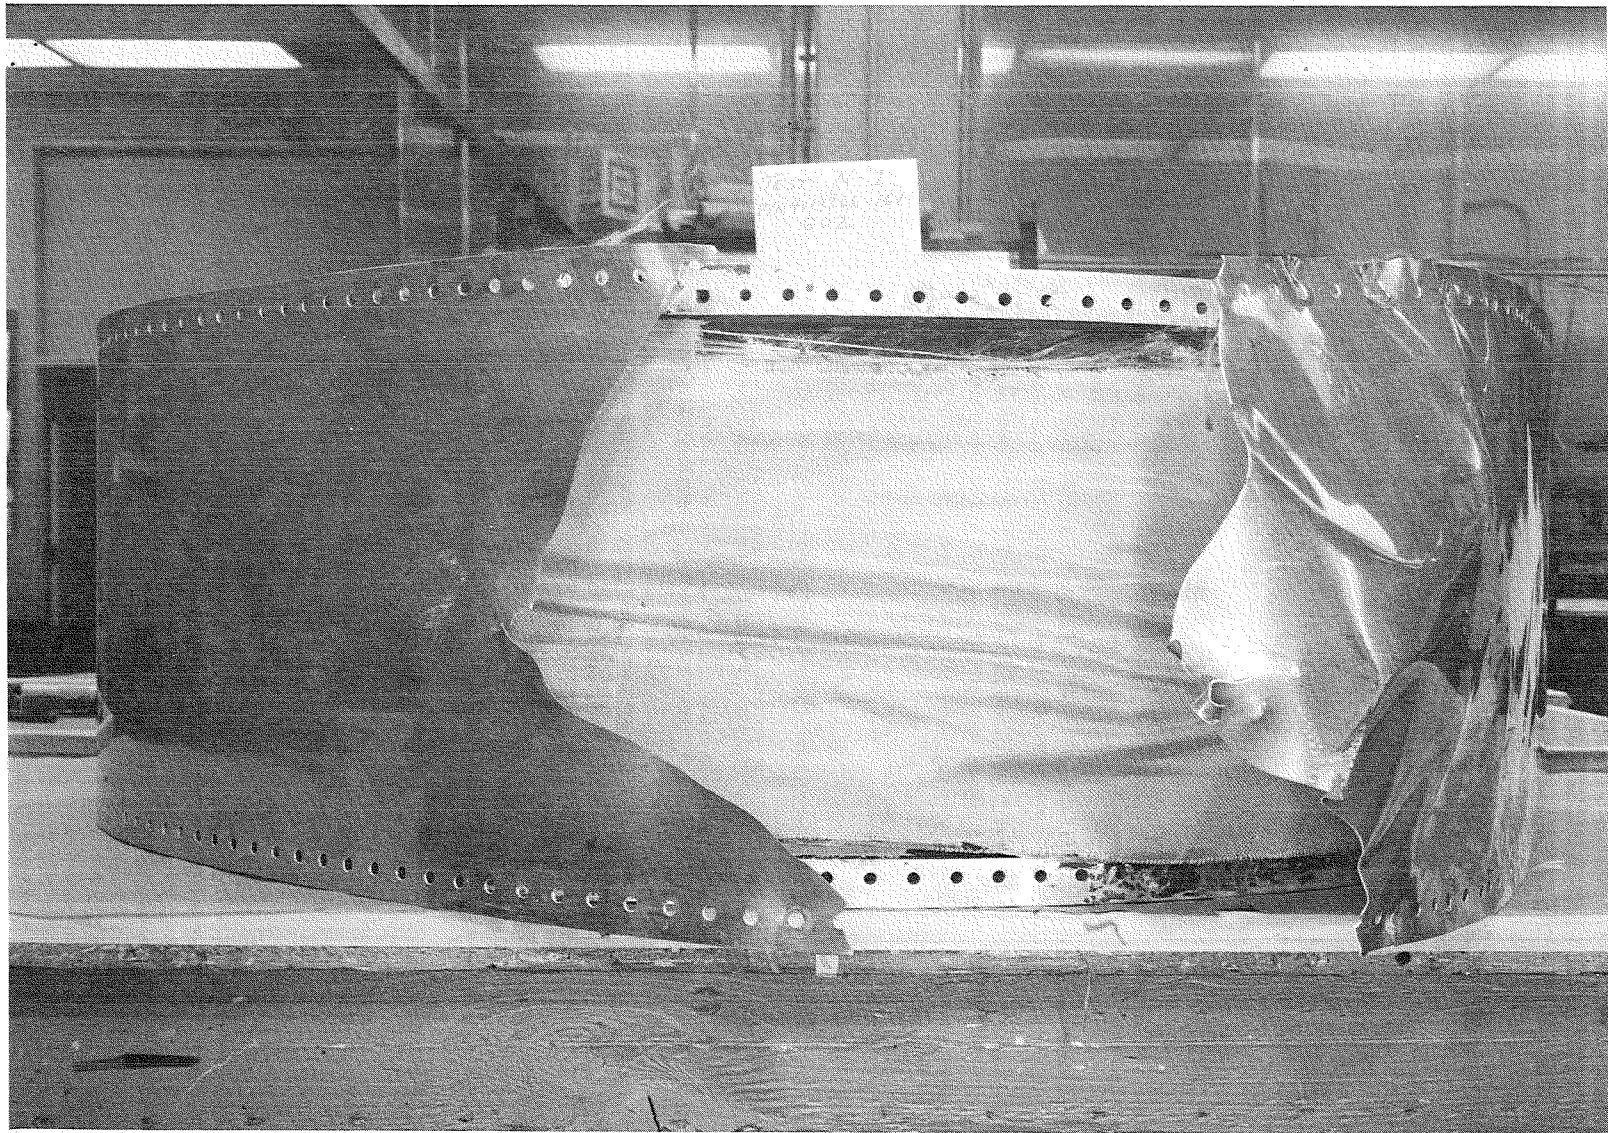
Exterior View - Eight-Ply Side - Test 1.
